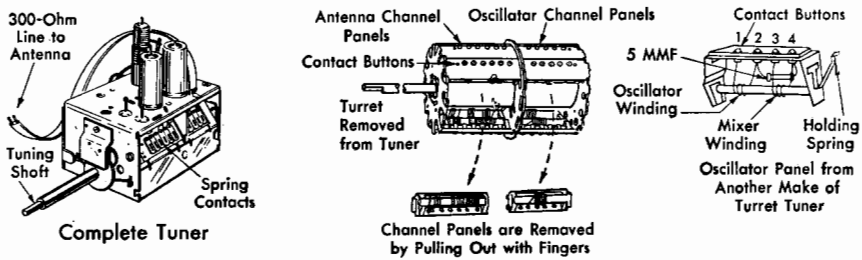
Example of turret tuner for television sets, showing arrangement of removable panels containing coils for each channel. Turning the tuning shaft moves a different pair of panels against spring contacts that connect to receiver circuits
